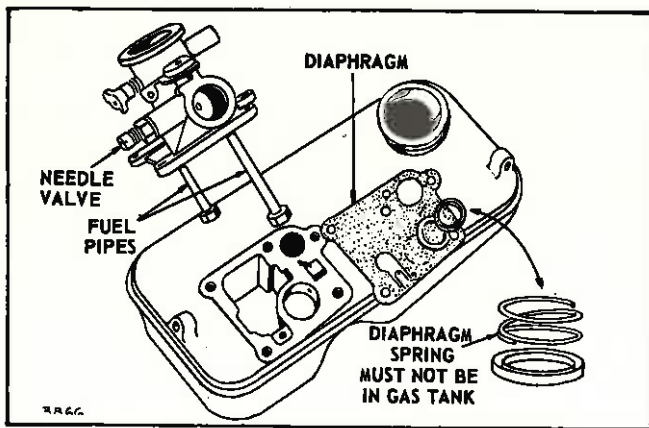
Exploded View - Carburetor and Tank Assembly
